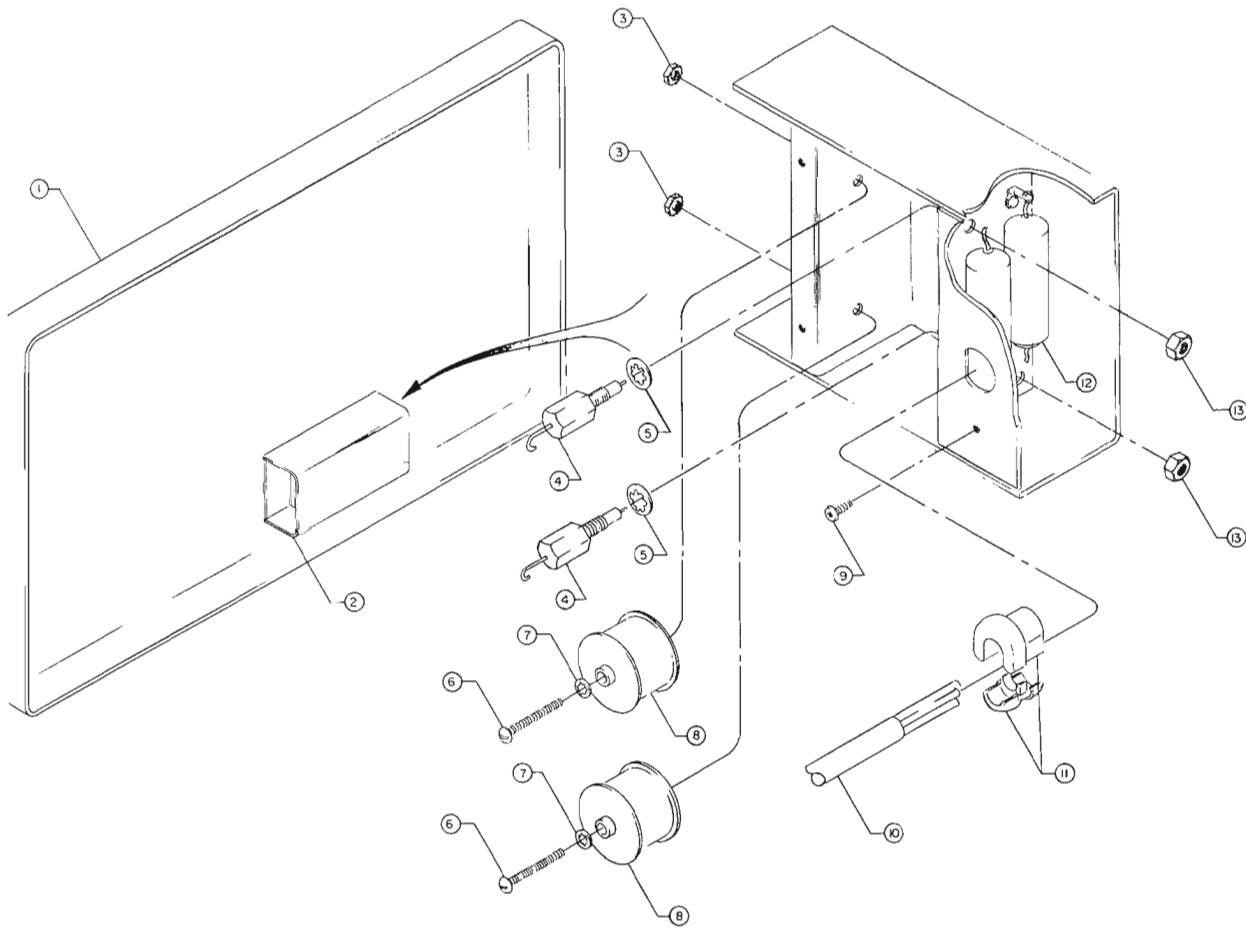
Model 606A High Frequency Signal Generator, Rear Cover Filter Assembly
